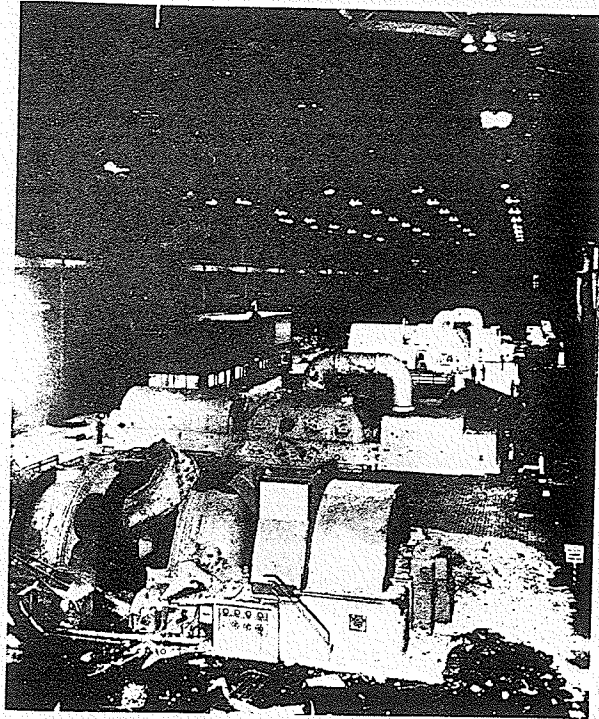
View of Ridgeland power station following turbine spindle failure (6)
